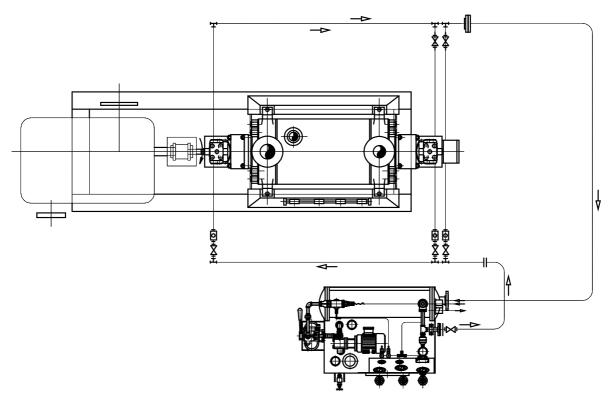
Lube oil system at the side of the pump for pump bearings lubrication only
